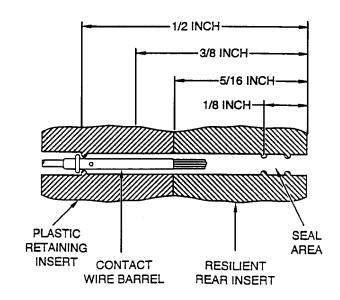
Contact Removal, Broken Wire Contact, Rear Release (Sheet 1 of 2)
